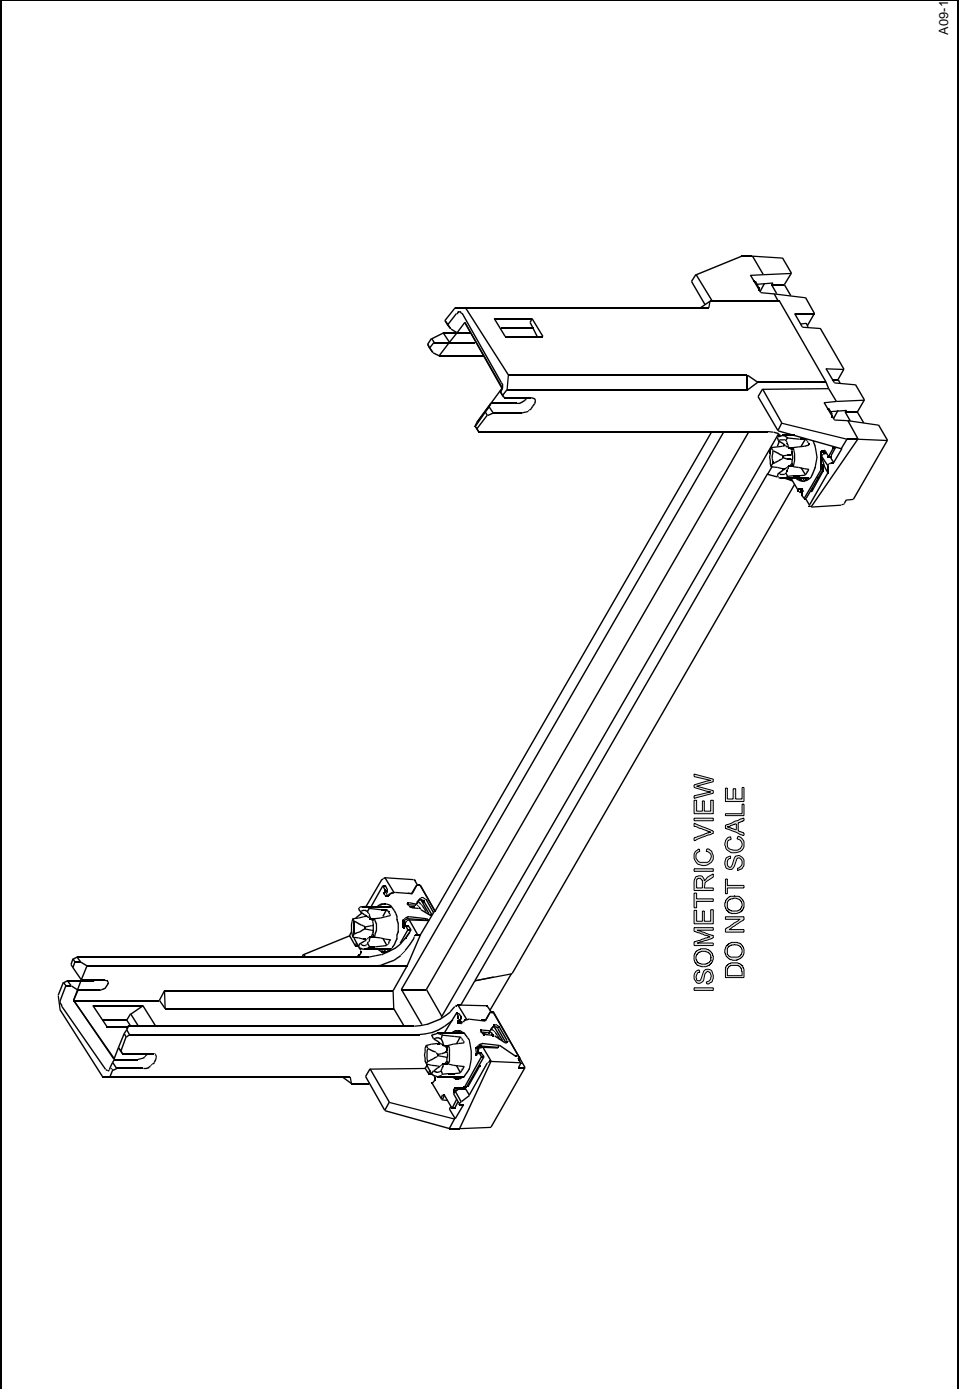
Retention Mechanism Assembled View, Cover Side View
